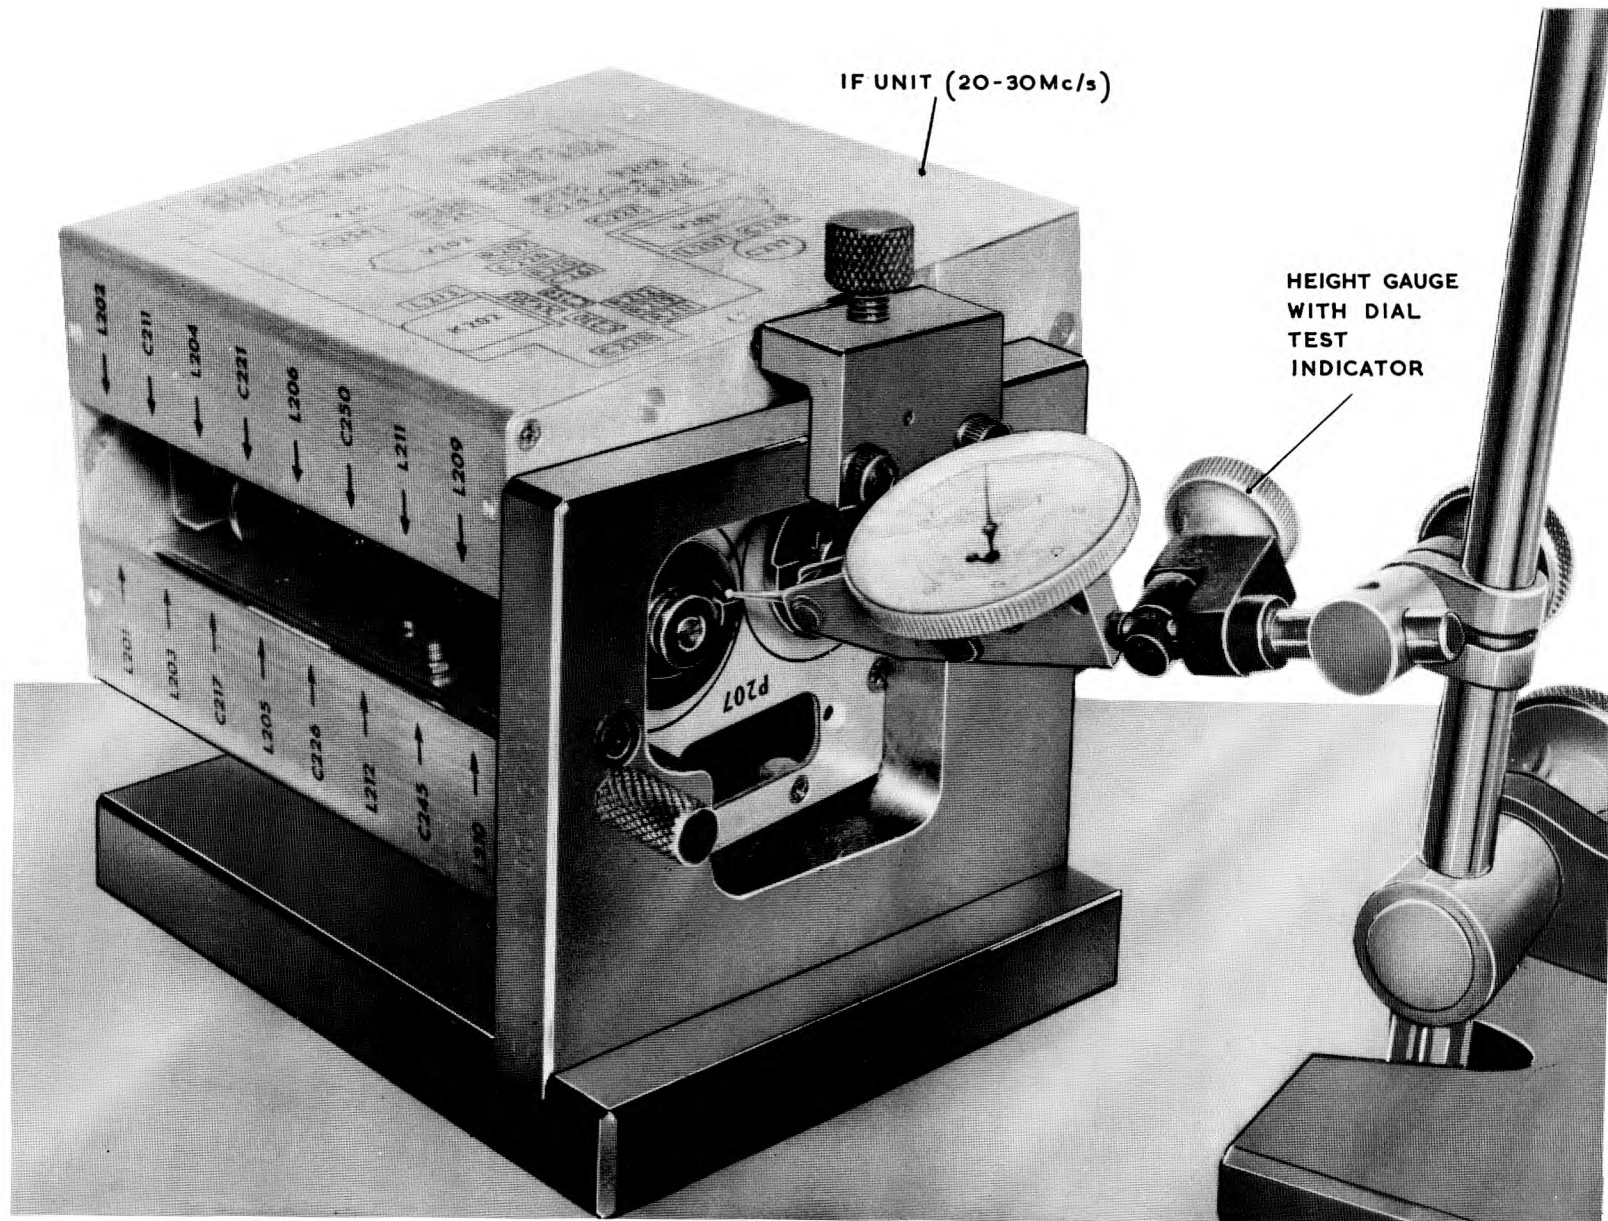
Checking fixture with IF unit (20 - 30Mc/s) in position
